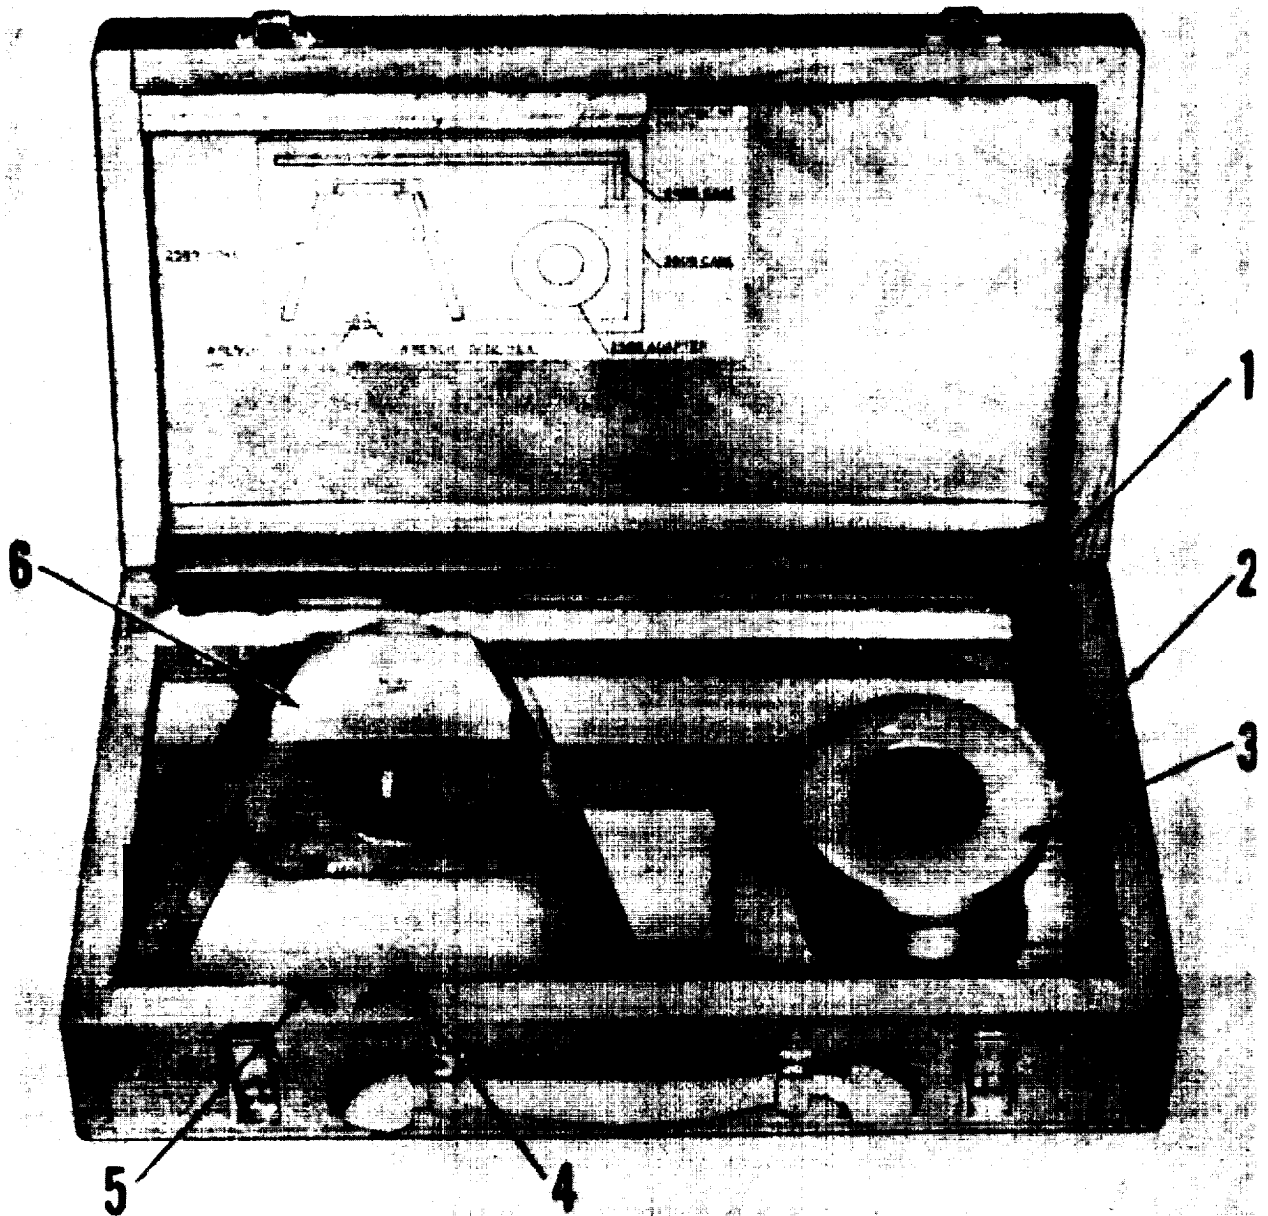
Main Rotor Balancing Adapter Kit 7HEL061.
